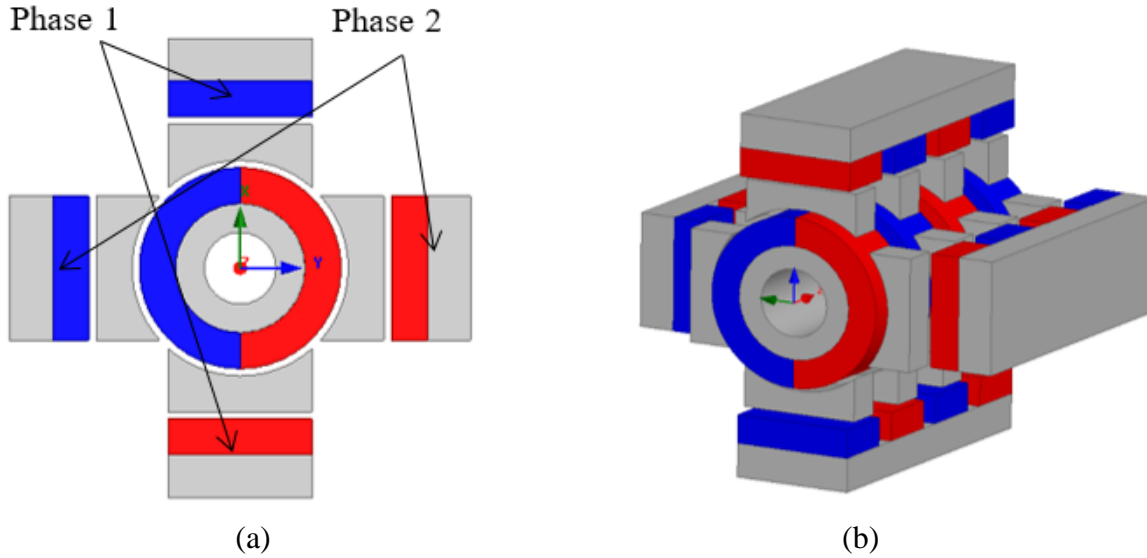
23. Structure of the magnetic gear a) front view, b) isometric view
